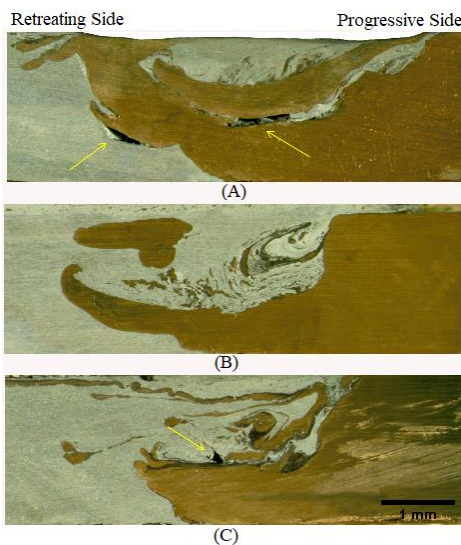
Structure of welding of samples (g), (h), and (a)
